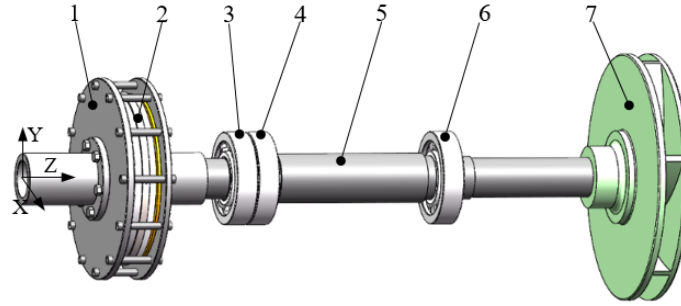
Three-dimensional model of centrifugal pump rotor system: 1 – driver rotor of ADPMC, 2 – driven rotor of ADPMC, 3 – bearing I, 4 – bearing II, 5 – centrifugal pump shaft, 6 – bearing III, 7 – impeller
